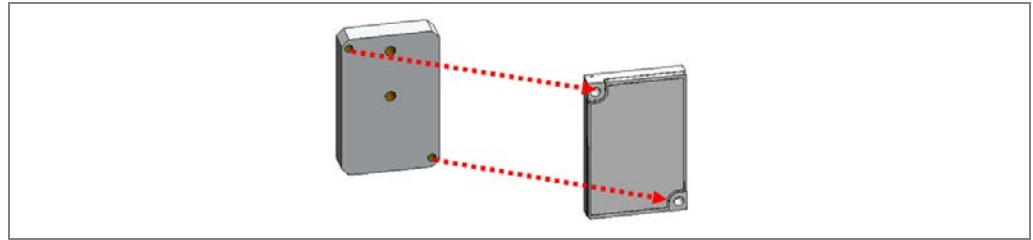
Steel frame: mounting the reflector on the adapter plate
